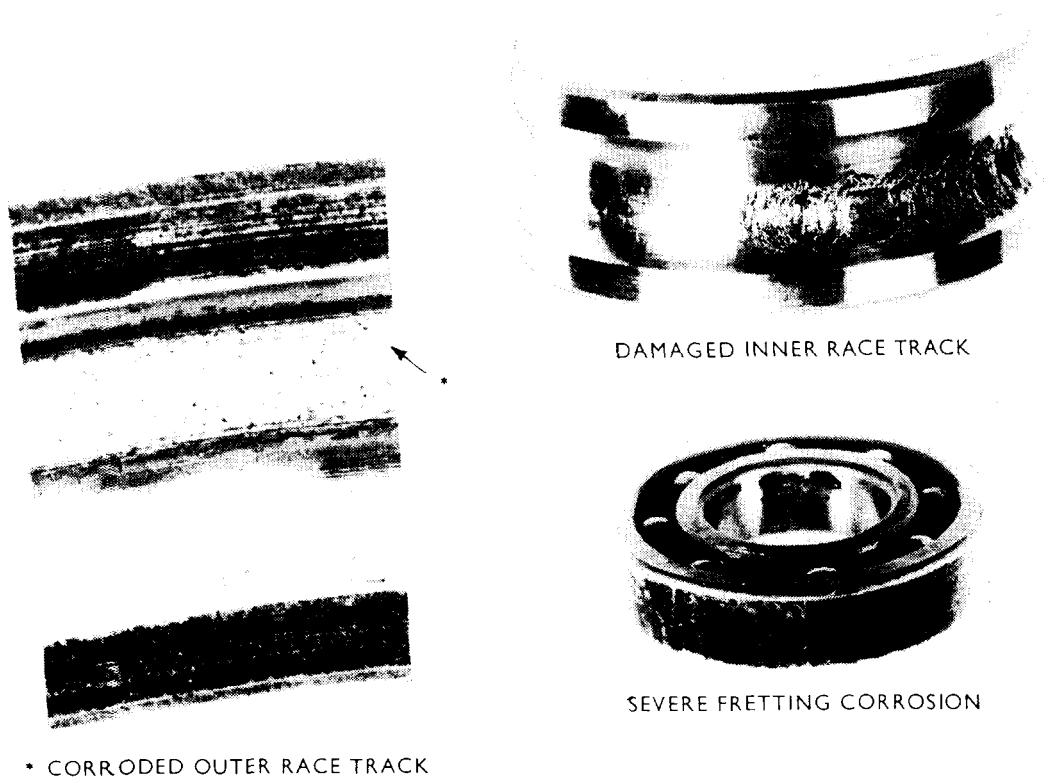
DEFECTIVE MOTOR DRIVE END BEARING
